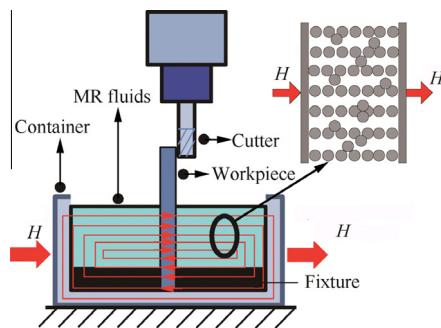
Workpiece-fixture-cutter system based on magnetorheological fluids.
